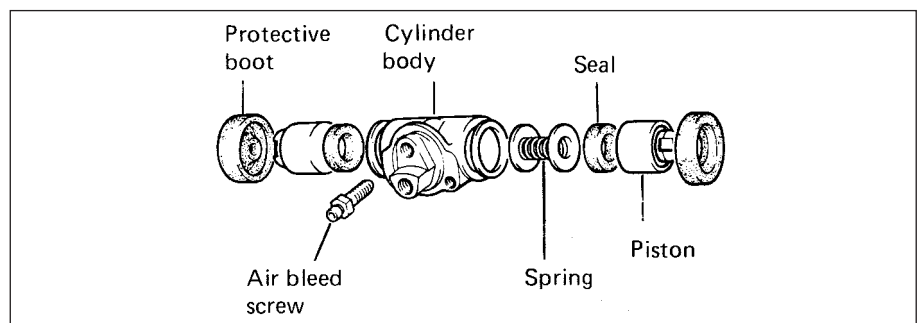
Exploded view of a rear wheel cylinder (Sec 7)
